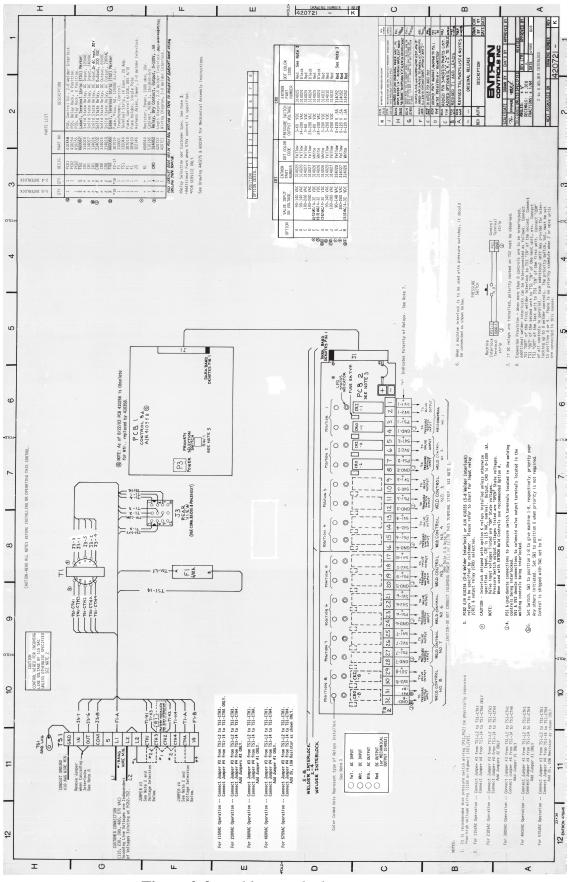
Welder Interlock Wiring Diagram
